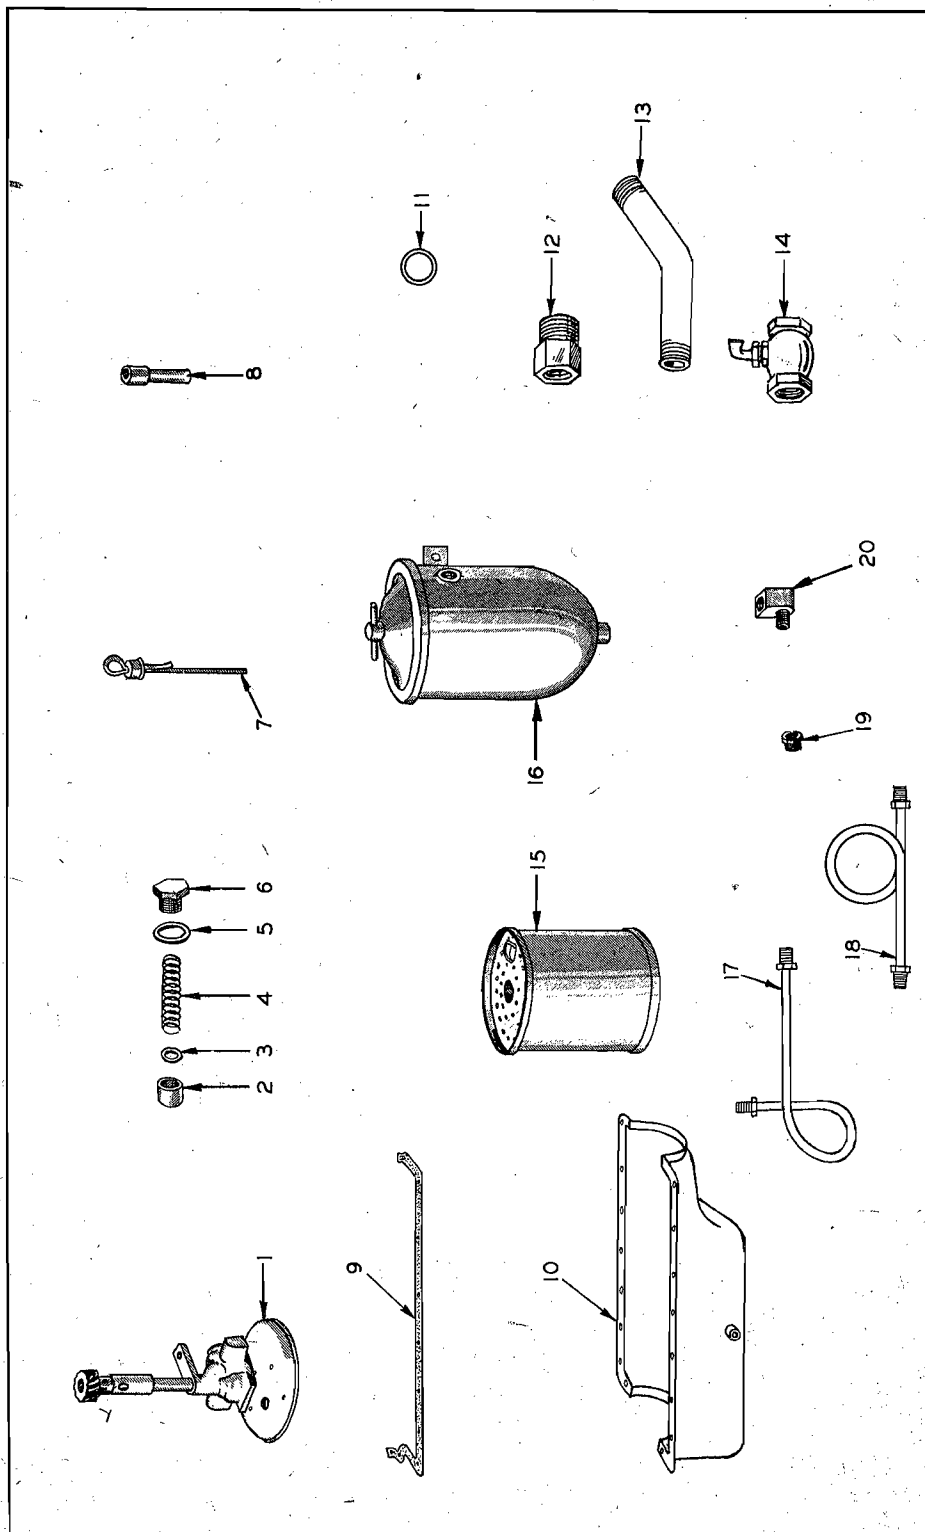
OIL PUMP AND OIL FILTER GROUP
